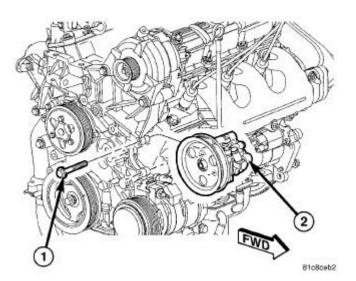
Removing/Installing Power Steering Pump Courtesy of CHRYSLER LLC
